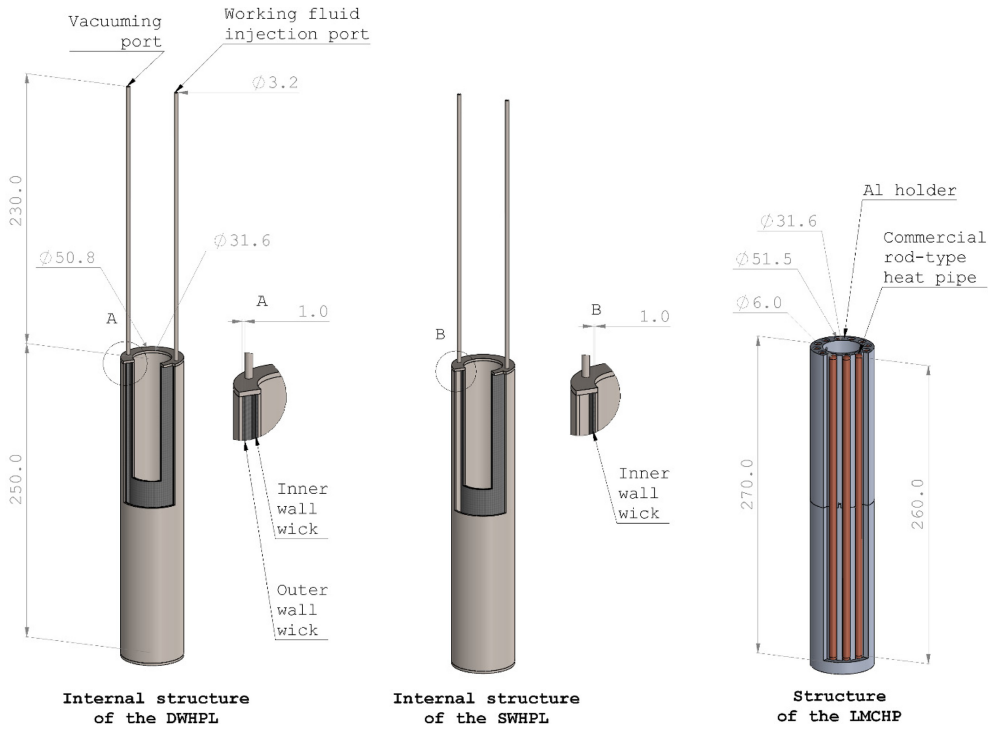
Dimensions and section views of the tested HPLs (dimensions in millimeters) [17] (Adapted from Ref. 17 with permission)
